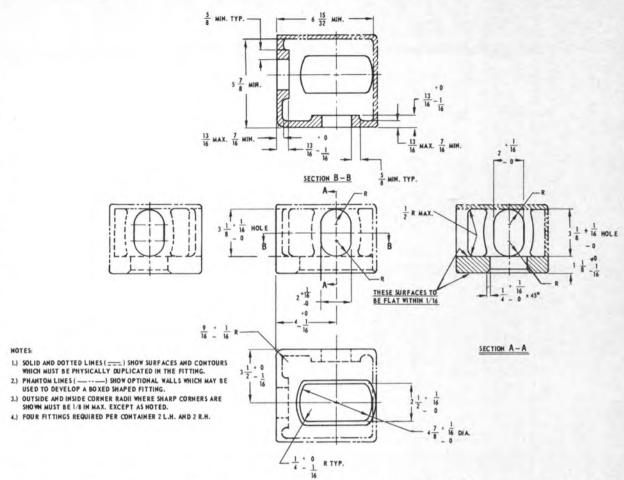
USASI MH 5.1 revised (I.S.O.) design of bottom corner fitting on containers. Dimensions given in inches.
